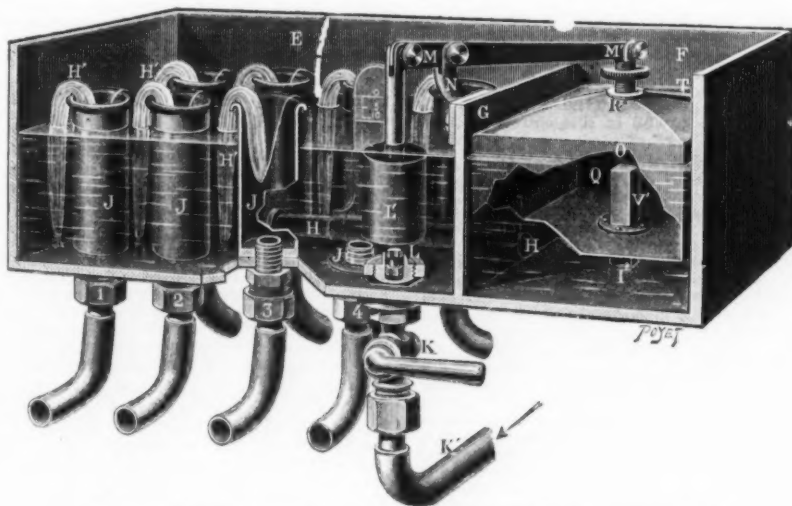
GENERAL VIEW OF THE LUBRICATING APPARATUS.
